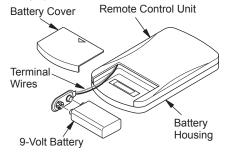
Installing Battery in Hand-Held Remote Control Unit
